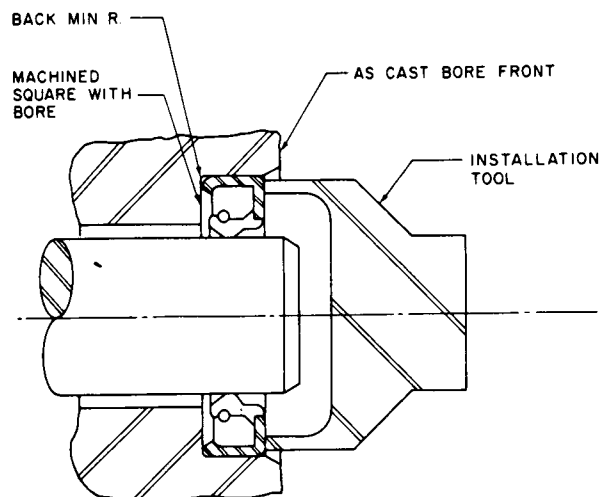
BOTTOM BORE: SEAL BOTTOMS ON MACHINE BORE SHOULDER
